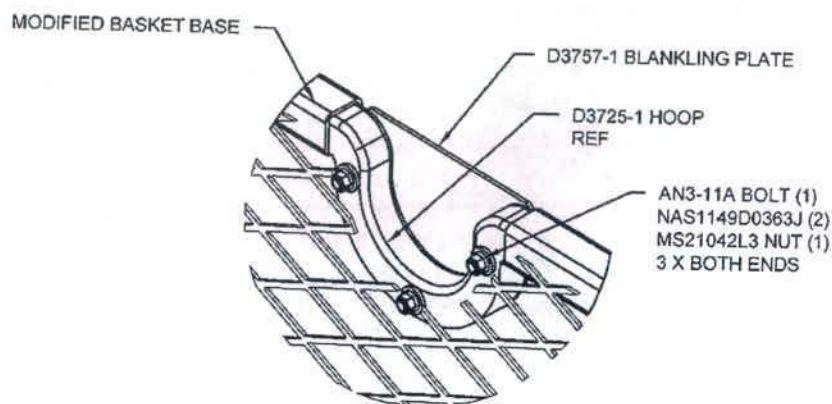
D3757-1 BLANKING PLATE INSTALLATION
